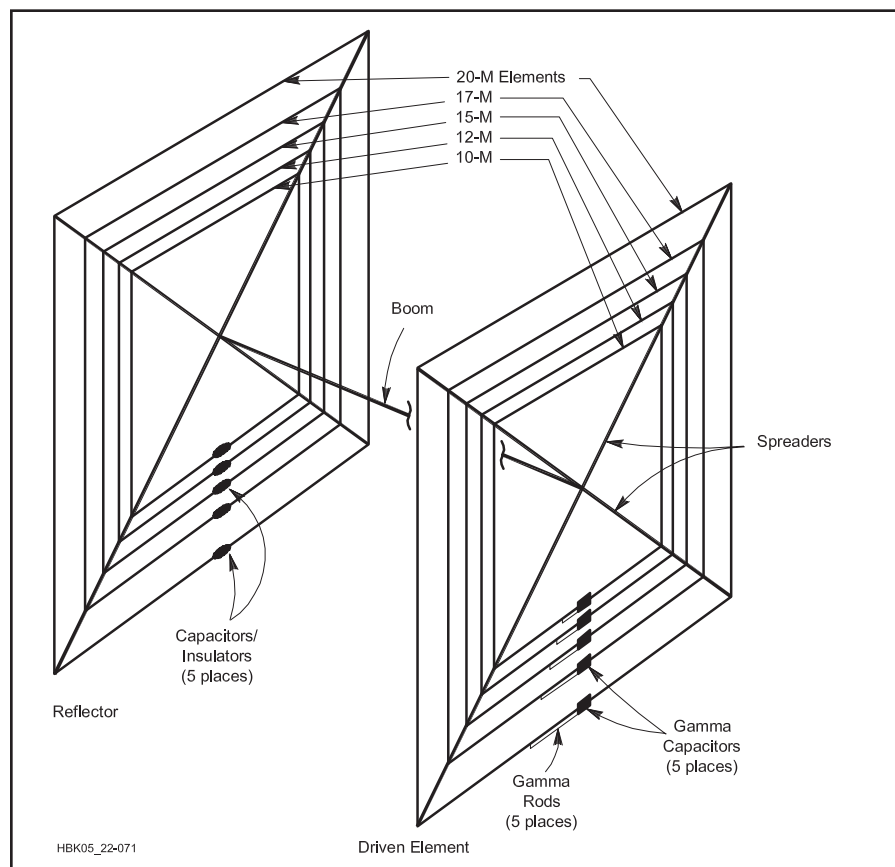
Mechanical layout of the five-band quad. The boom is 8 ft long; see Table 21.16 for all other dimensions.
